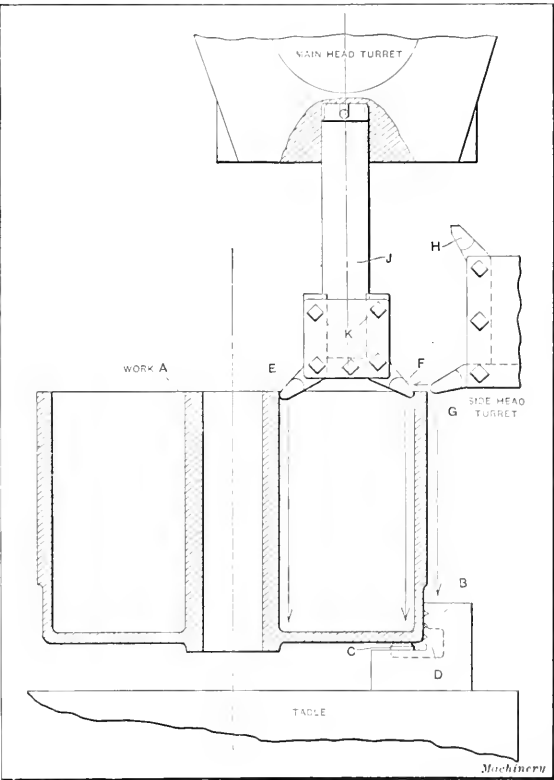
Another Thin Casting machined in the Vertical Turret Lathe
